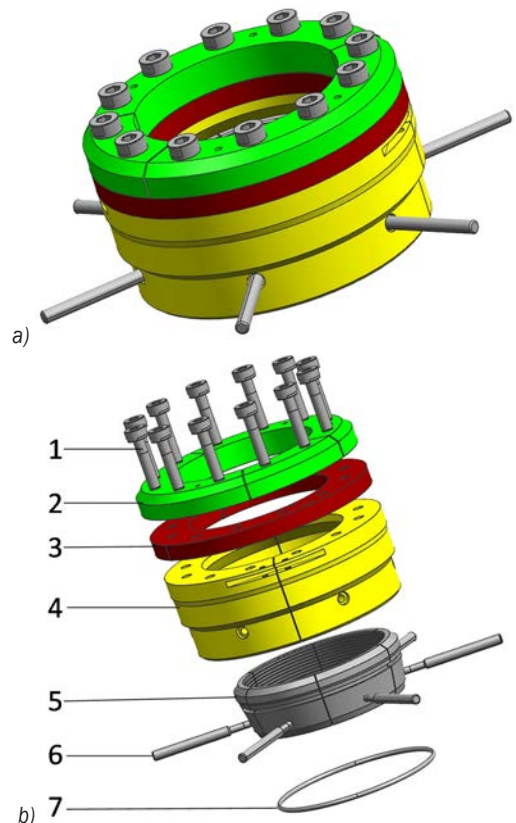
a) WE-type-slip hanger assembly diagram; b) WE-type slip hanger exploded view
